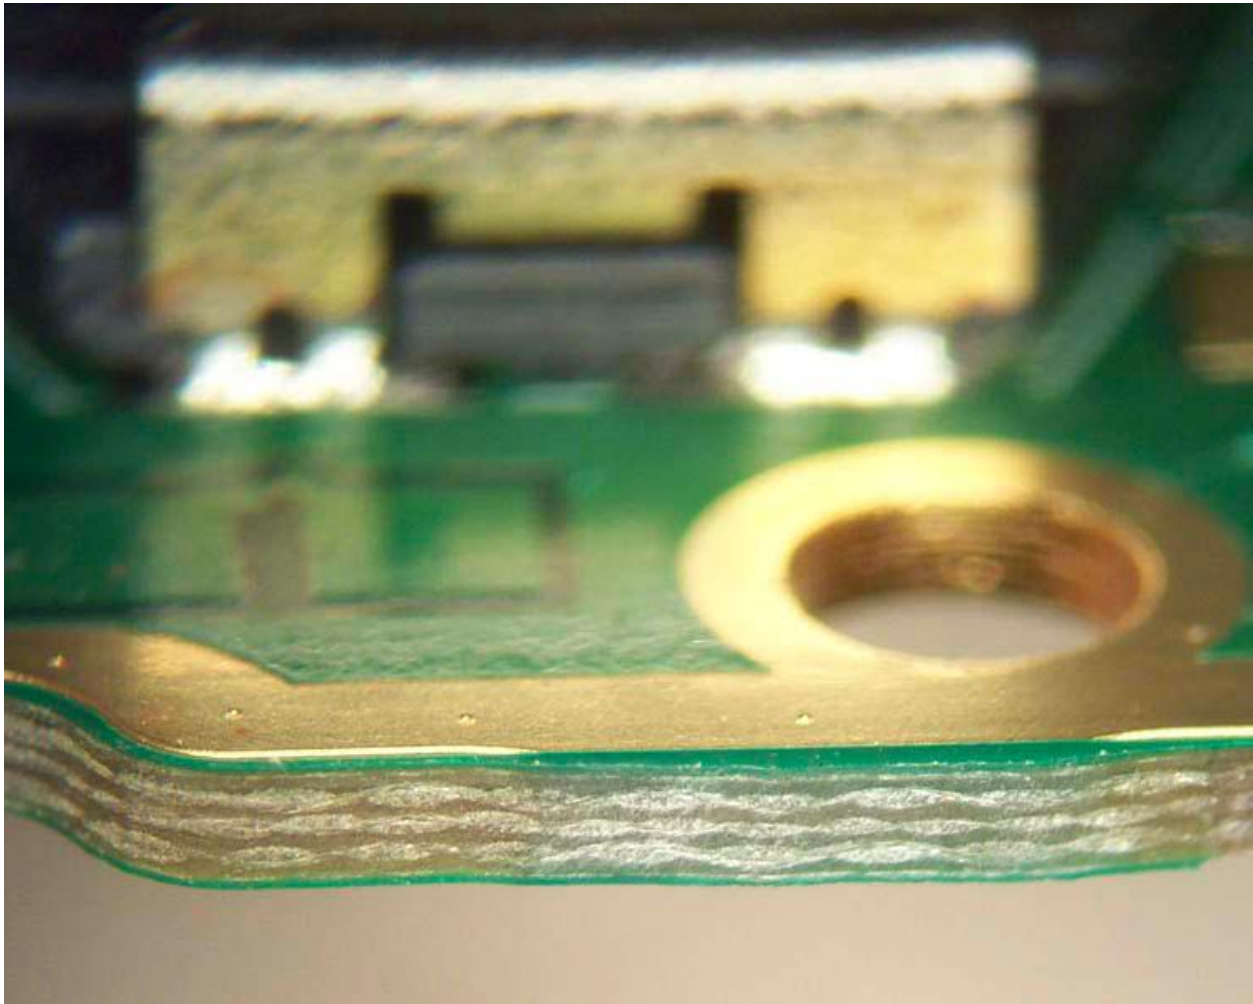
PCB layout detail illustrating 6 metal layer processes.
